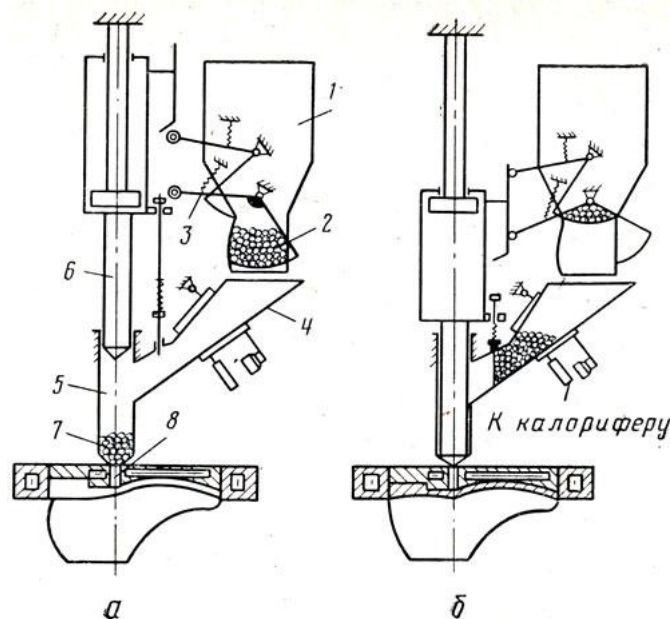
Schemes of the piston injection machine LPGV-0 before casting (a) and after casting (b)
